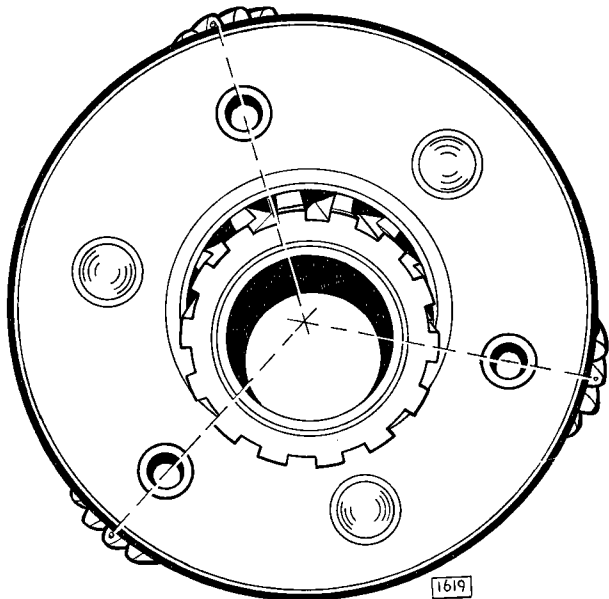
Assembly of the planet gears—note the positions of the marked teeth
